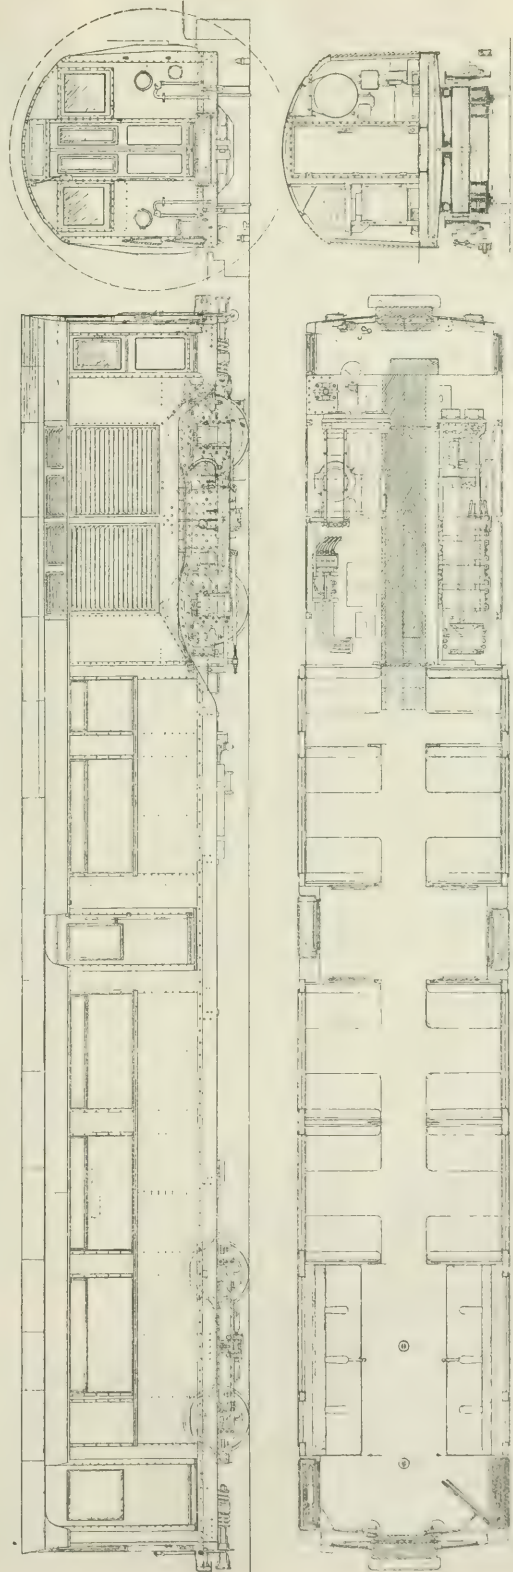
ELEVATION, PLAN, AND SECTIONS OF NEW BAKERLOO MOTOR CAR.
